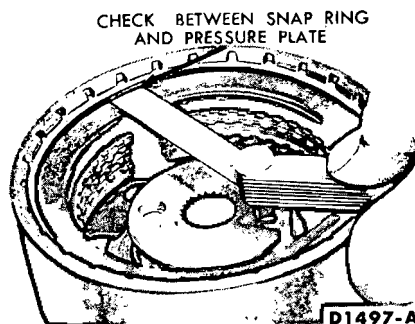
Checking Forward Clutch Snap Ring Clearance
